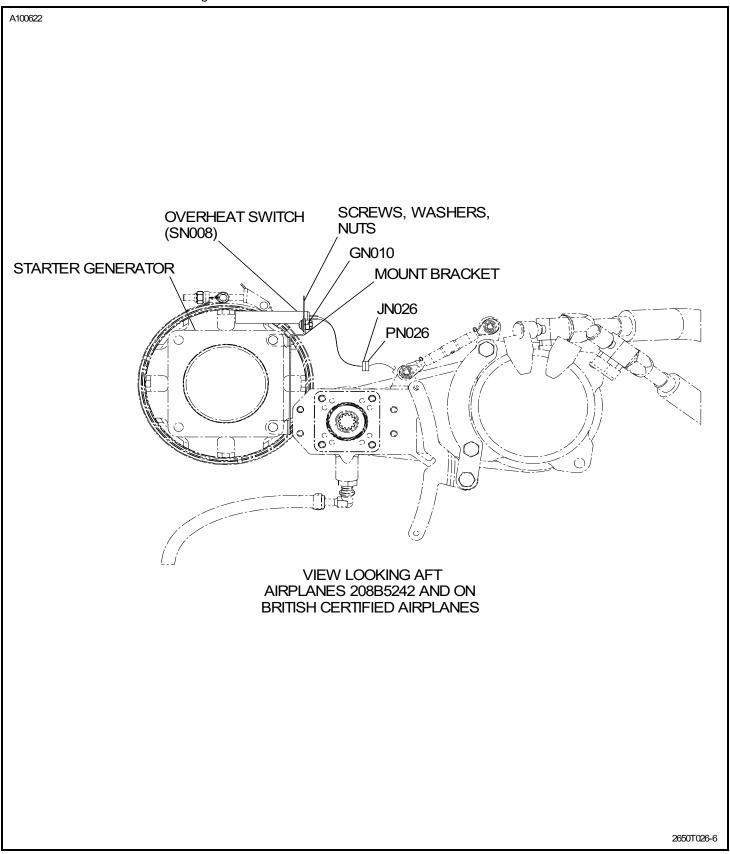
Sheet 1 : Overheat Switch Removal and Installation
